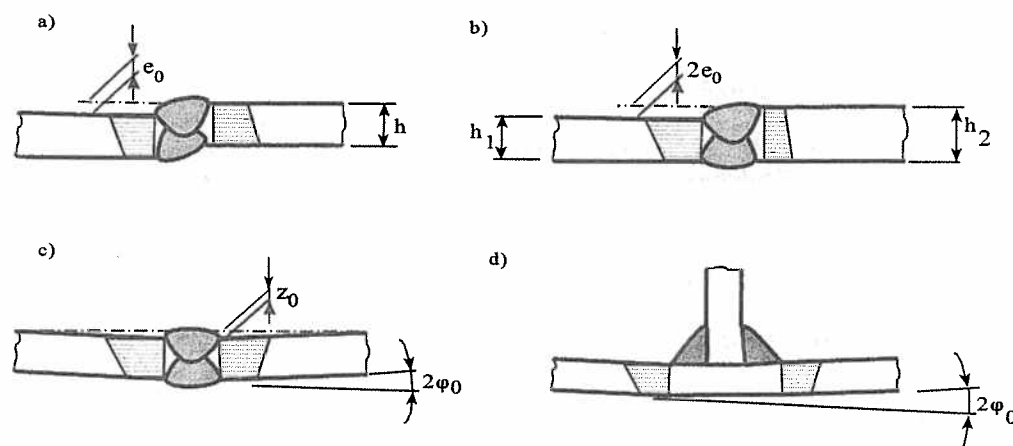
Welded joints containing different types of misalignment.
